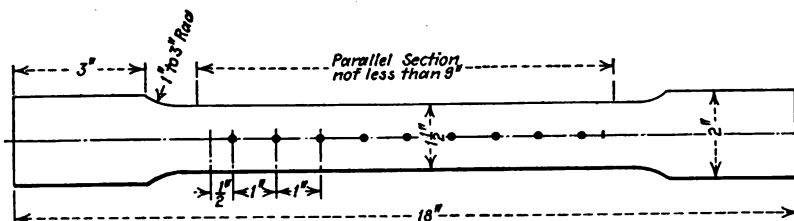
STANDARD FORM OF TEST SPECIMEN REQUIRED FOR ALL TENSION TESTS OF PLATE MATERIAL
